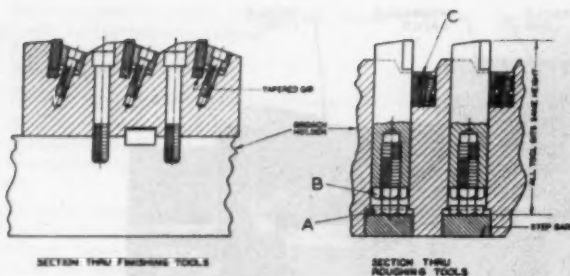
CROSS SECTION THROUGH ROUGHING AND FINISHING TOOLS MOUNTED ON HOLDER
